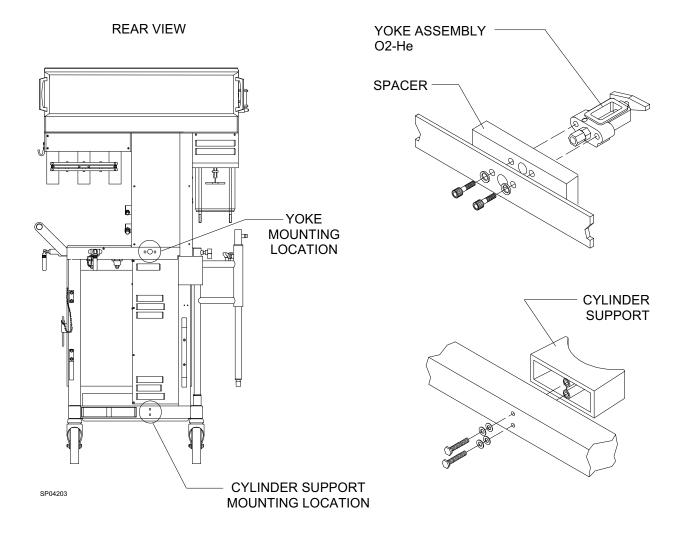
$O_2$ -He YOKE AND CYLINDER SUPPORT MOUNTING LOCATIONS
